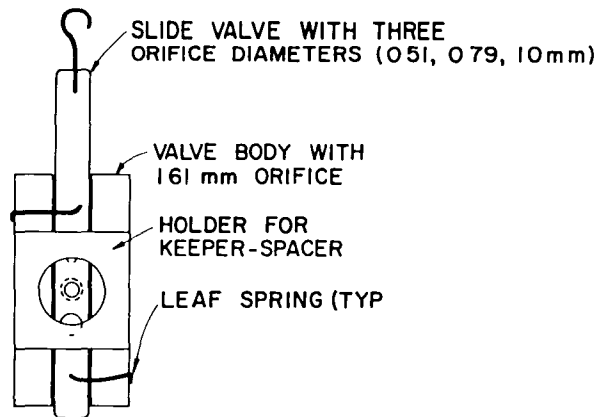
View of Downstream Side of Orifice Plate/Valve Assembly
